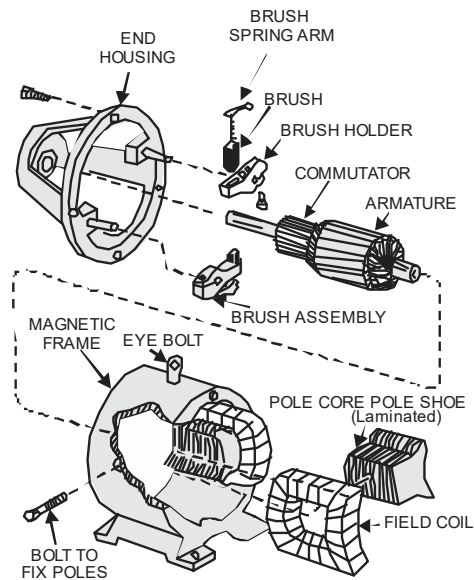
(d) Parts of a dc machine (pencil sketch)
